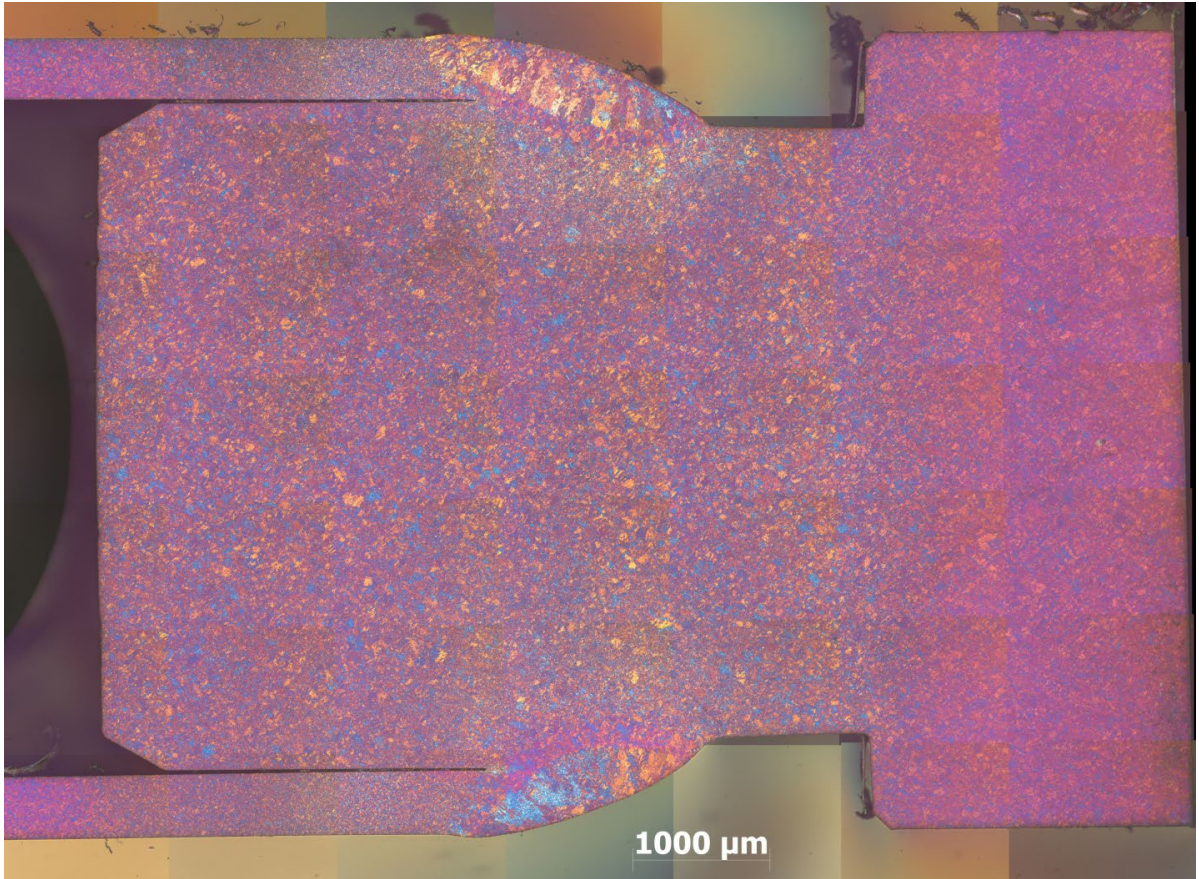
Mosaic of weld and plug of the spade end weld.
